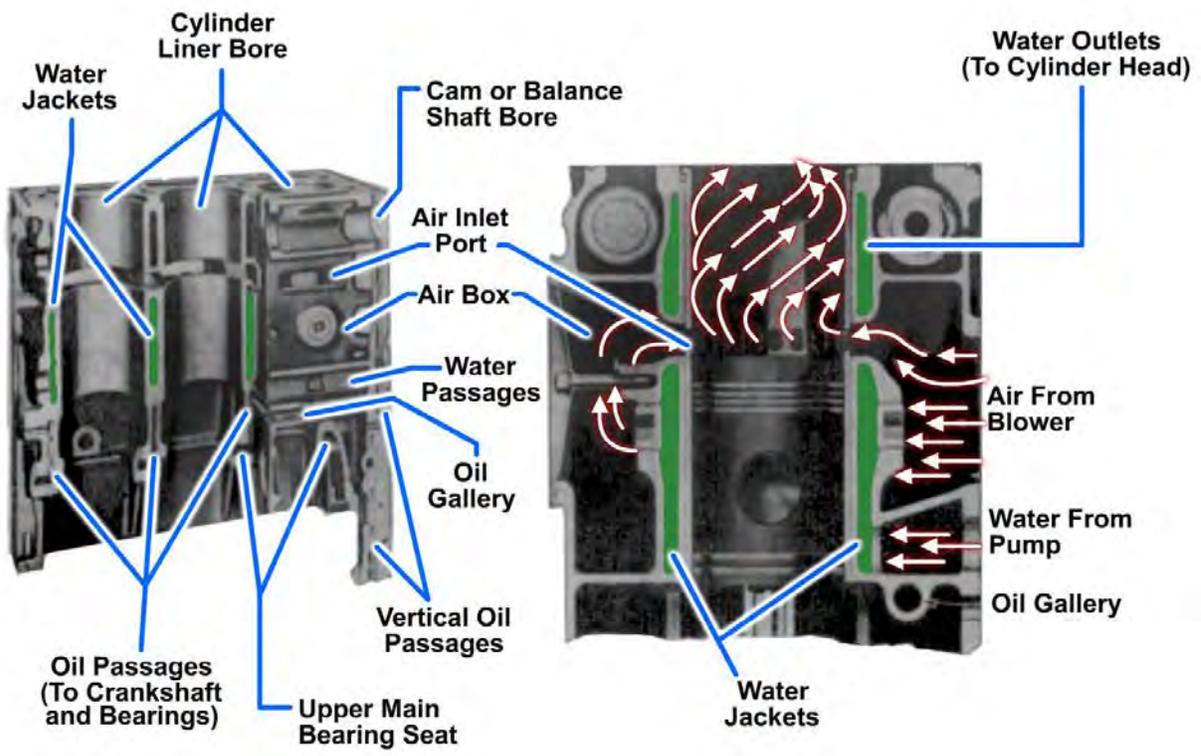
Cutaway view of a cylinder block showing air and water passages.
